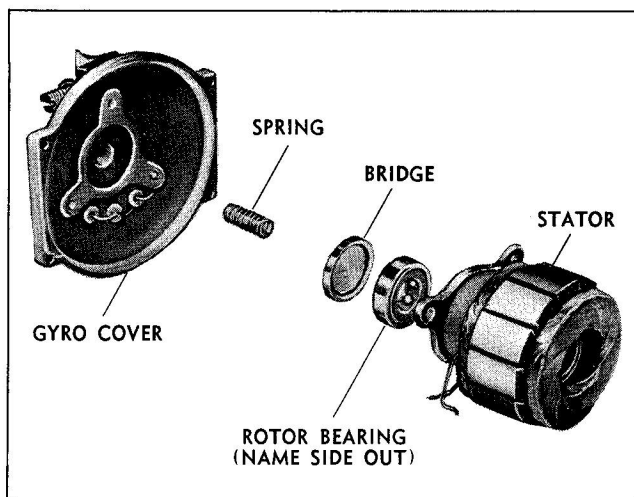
Exploded View of Gyro Cover and Stator Assembly
